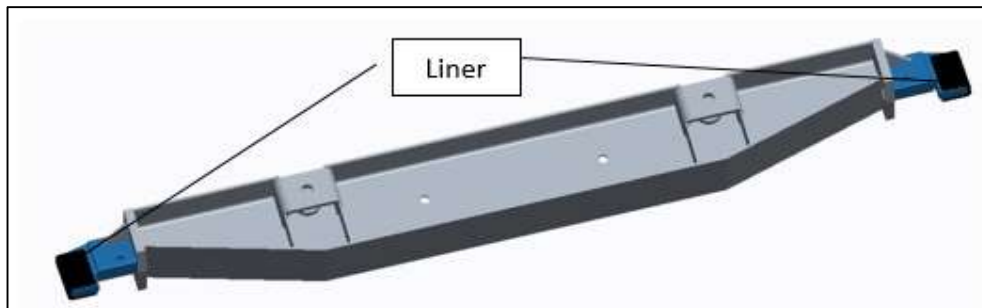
Secondary Brake Beam (Drg. No.3EB5522 Alt Latest)
